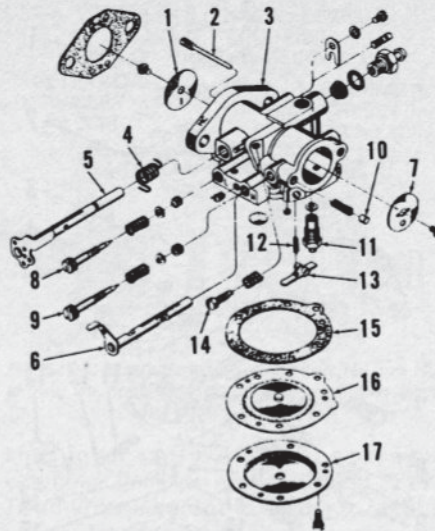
Exploded view of Tillotson model HC carburetor. Model HJ is similar.
